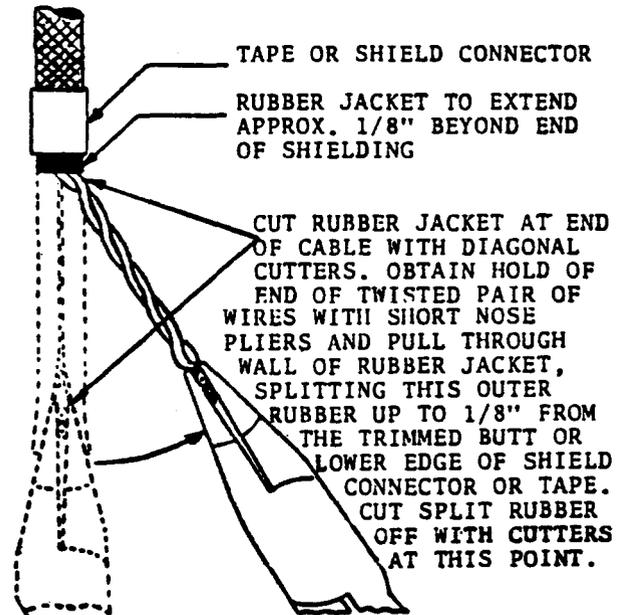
REMOVING RUBBER JACKET - 720 CABLE (PAR. 4.13)
